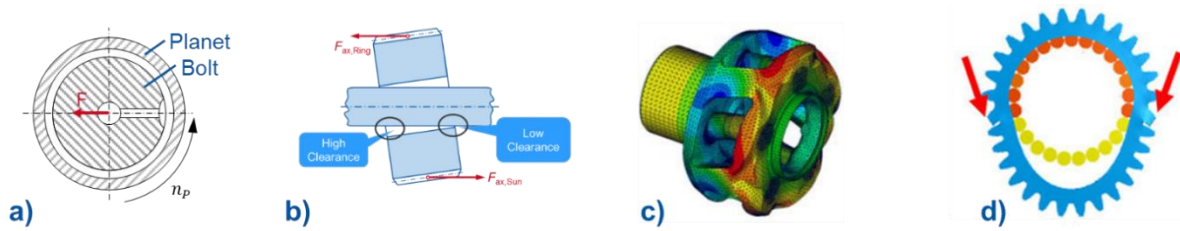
Typical load conditions of plain bearings in gearboxes of wind turbines: a) Radial overload, b) Tilting of the planetary gear, c) Deformation of the planet carrier, d) Ovalization of the planetary gear
